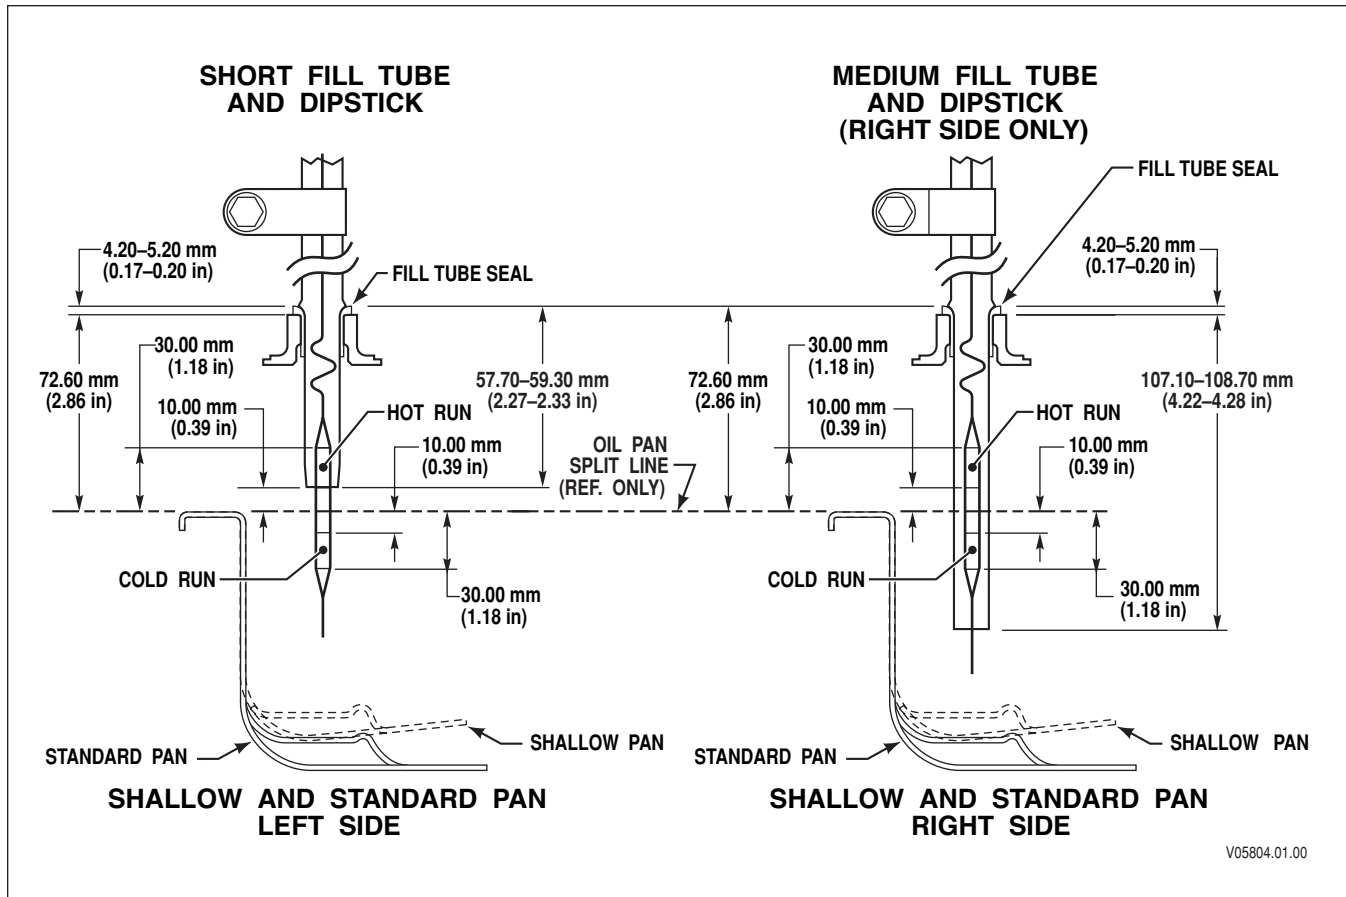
Short and Medium Fill Tube And Dipstick Requirements
